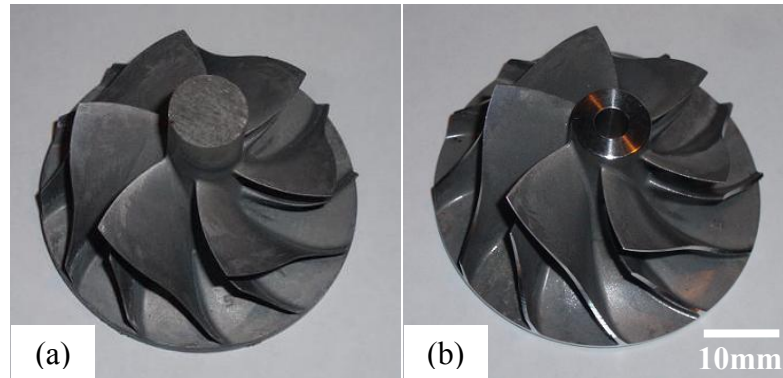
C355 aluminium compressor impellers in (a) cast and (b) machined condition for Phase 1 and 2 trials
